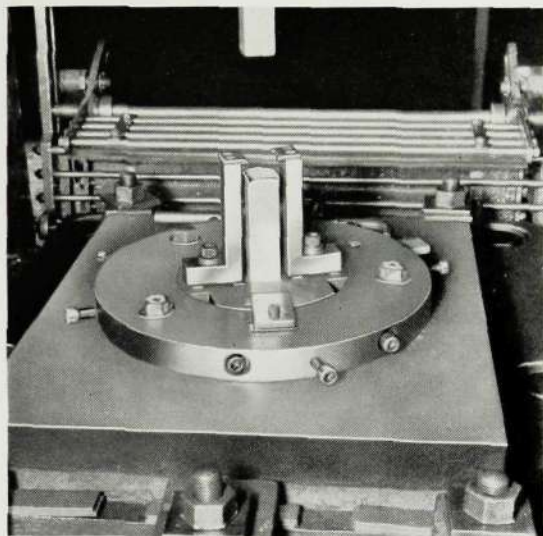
Press-tools for impact-extruding the cans G, Fig. 1. The extrusion is stripped from the punch by the fixed claws
